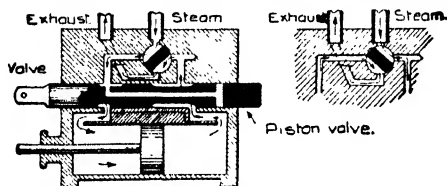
Piston-valve Cylinders and Reversing Gear Used on the High-grade Commercial Models.
